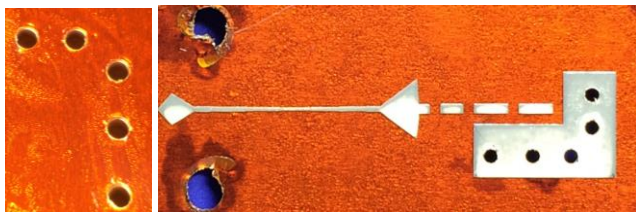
Left: Drilled via holes on polyimide and copper tape substrate. Right: Inkjet-printed board; feeding section, non-uniform transmission line, and SMD components pads.
